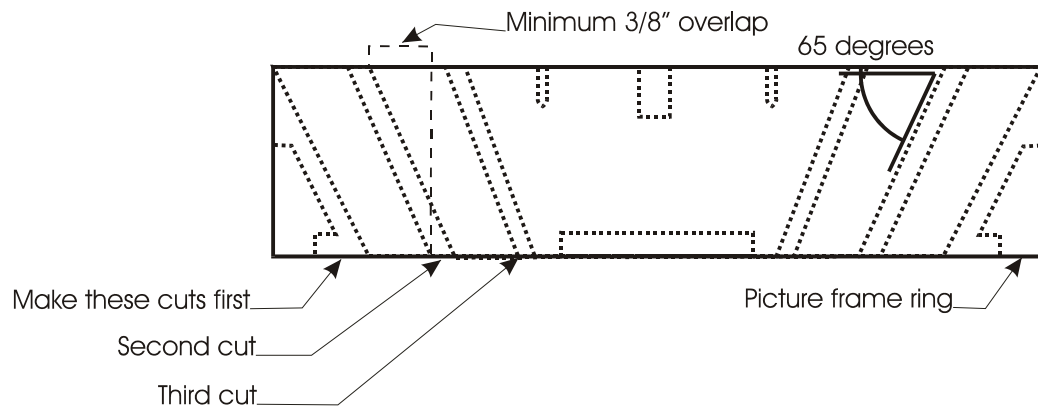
Sample drawing for 8" by 2" blank, with three sections.
